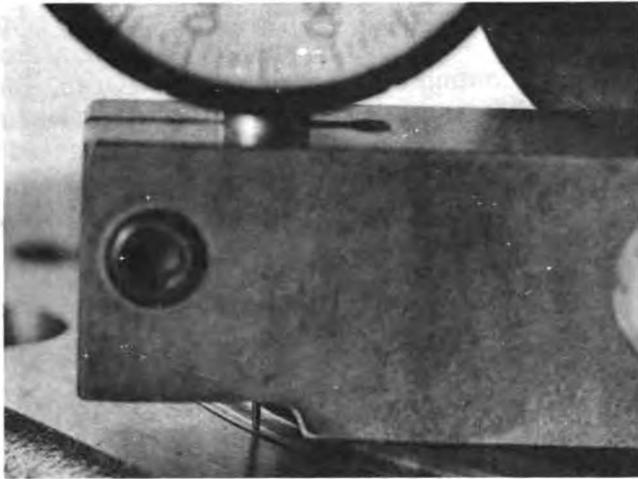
(V514150). Check The Protrusion Of The Liner
